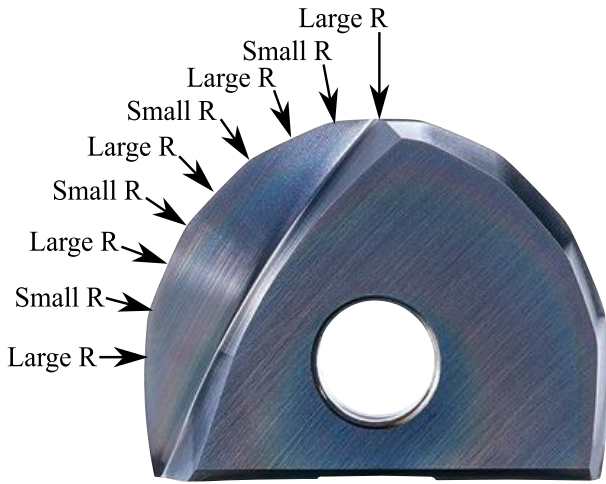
Complex shape tool “PolyBall”¹⁵⁾ produced by OSG Corporation.
